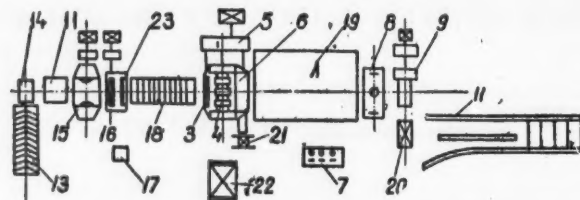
Diagram of disk shears unit 420 after reconstruction: 13) coil collector; 14) coil overturning device; 15) conical uncoiler; 16) feed rollers; 17) auxiliary control panel; 18) roll table; 19) auxiliary control post; 20) carriage; 21) skids; 22) box; 23) hydraulic shears (remainder as for Fig. 1).
